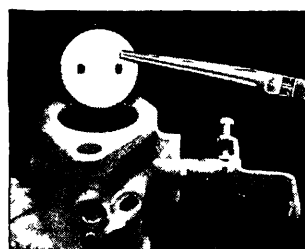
Remove throttle valve, throttle shaft and lever. Check shaft and hole in lever for wear, and for loss lever on shaft
